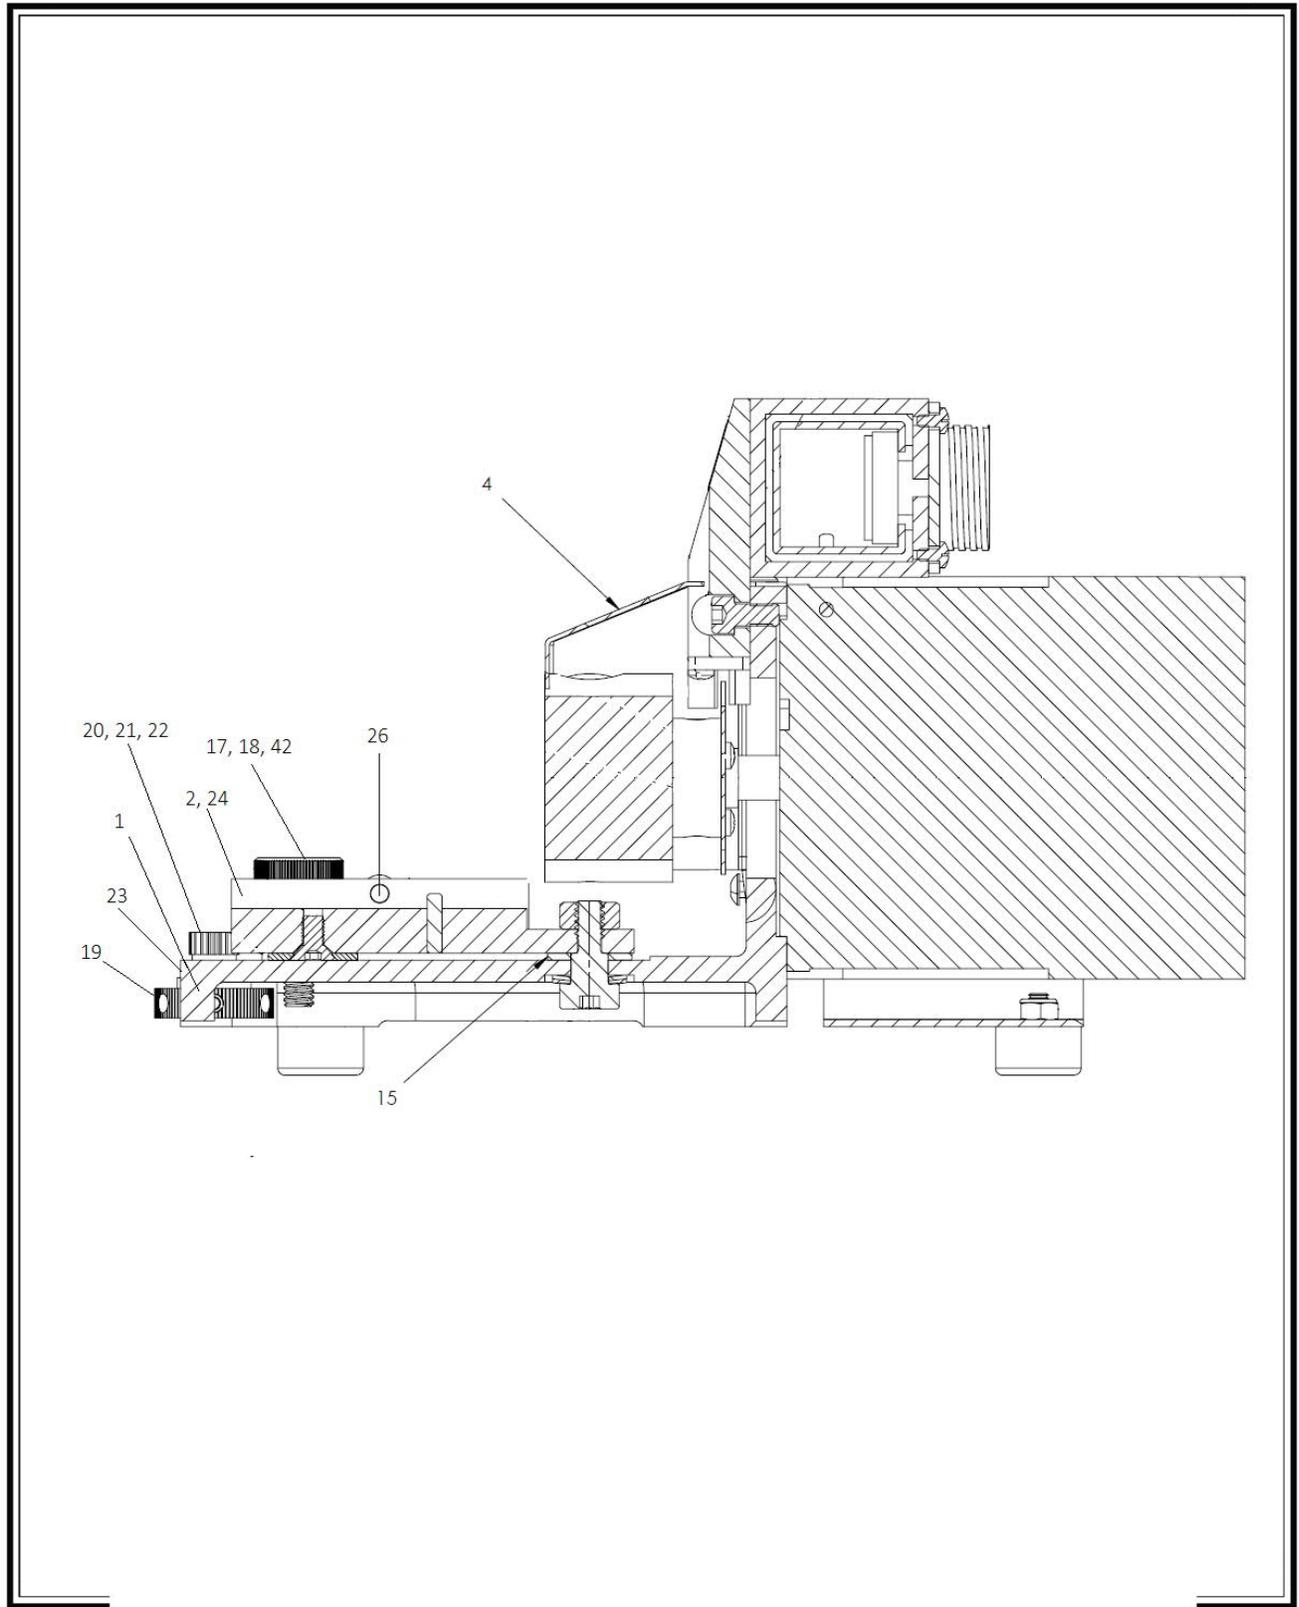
Single Ended Heavy Duty Motor/Base Module (Sheet 1 of 5)
